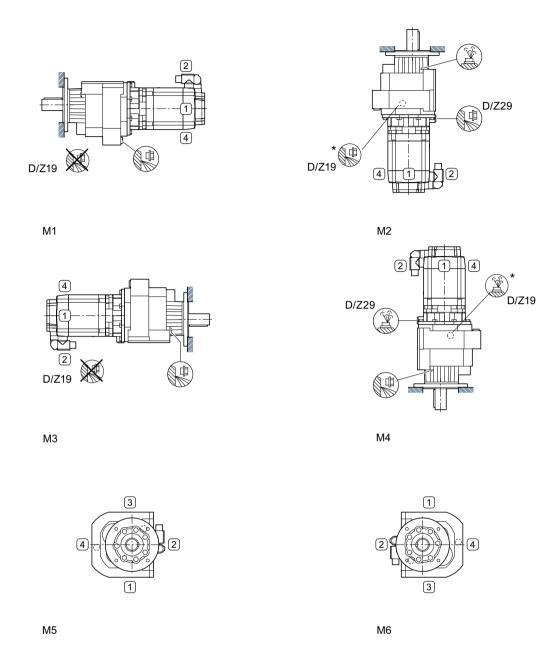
Mounting positions for servo helical geared motors DF and ZF (flange-mounted design) or DZ and ZZ (housing flange design), frame sizes 19 - 29, 2 stage and 3 stage
